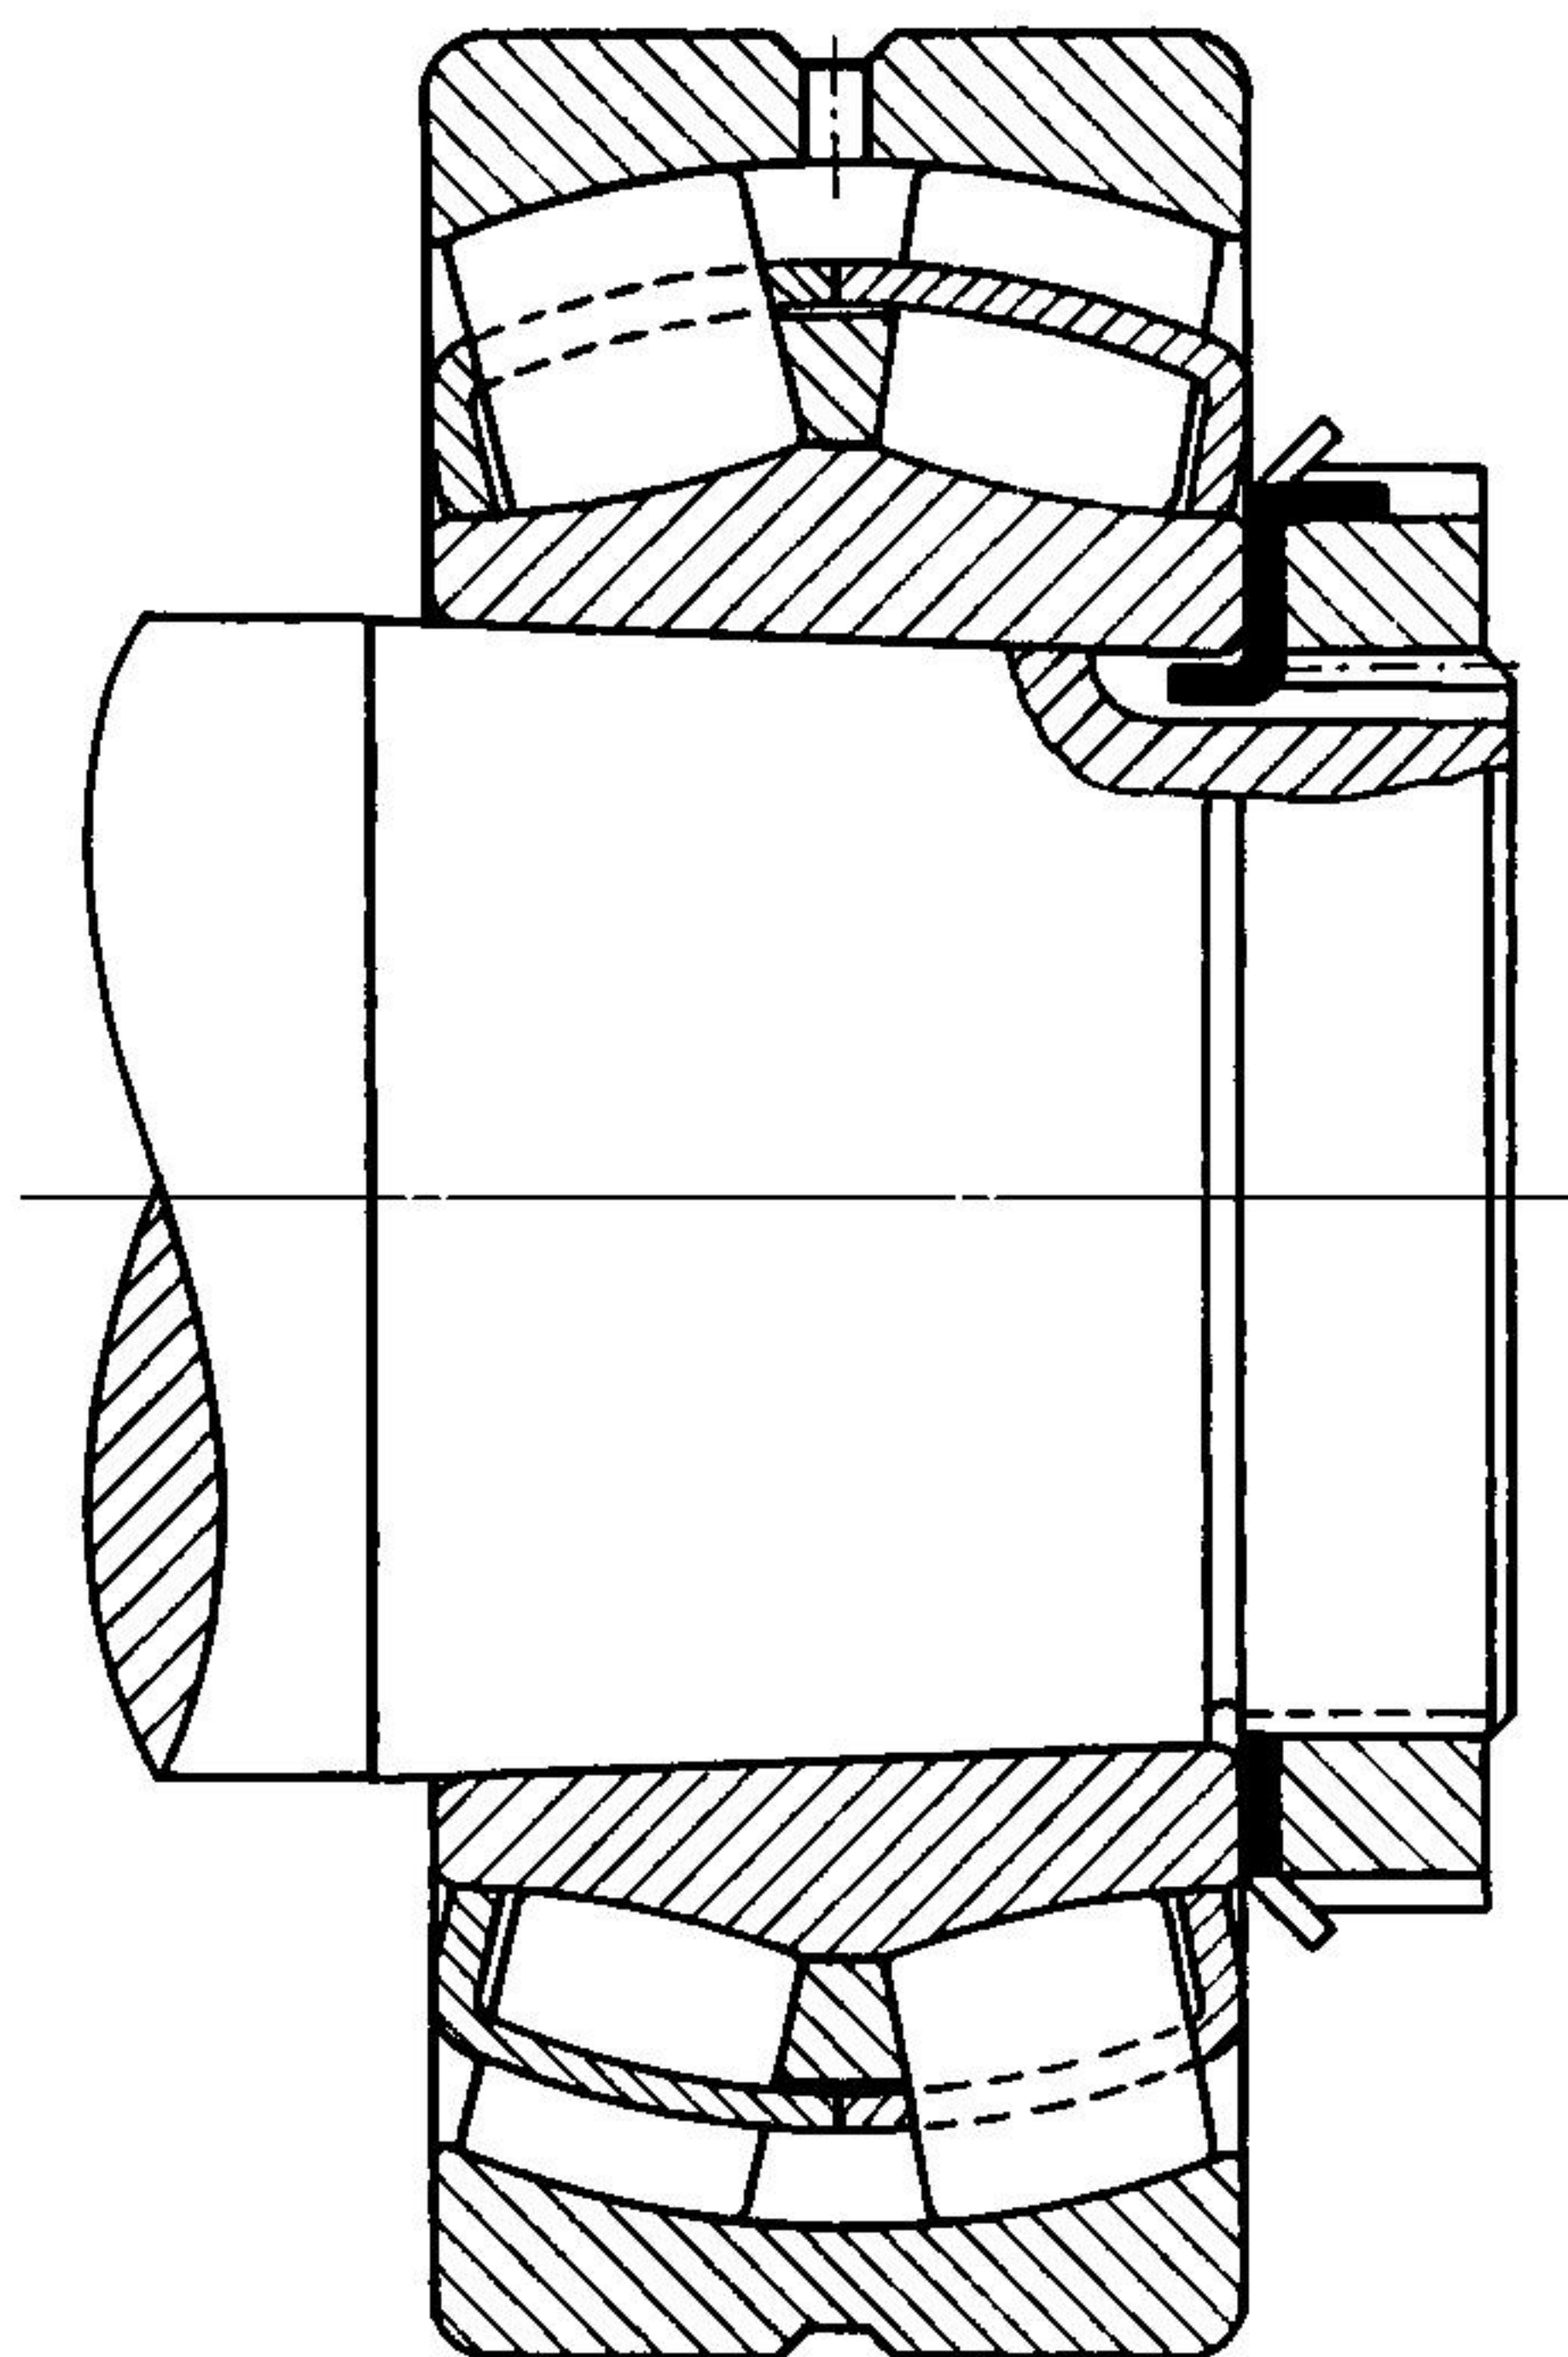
Direct shaft mounting of a spherical roller bearing.
